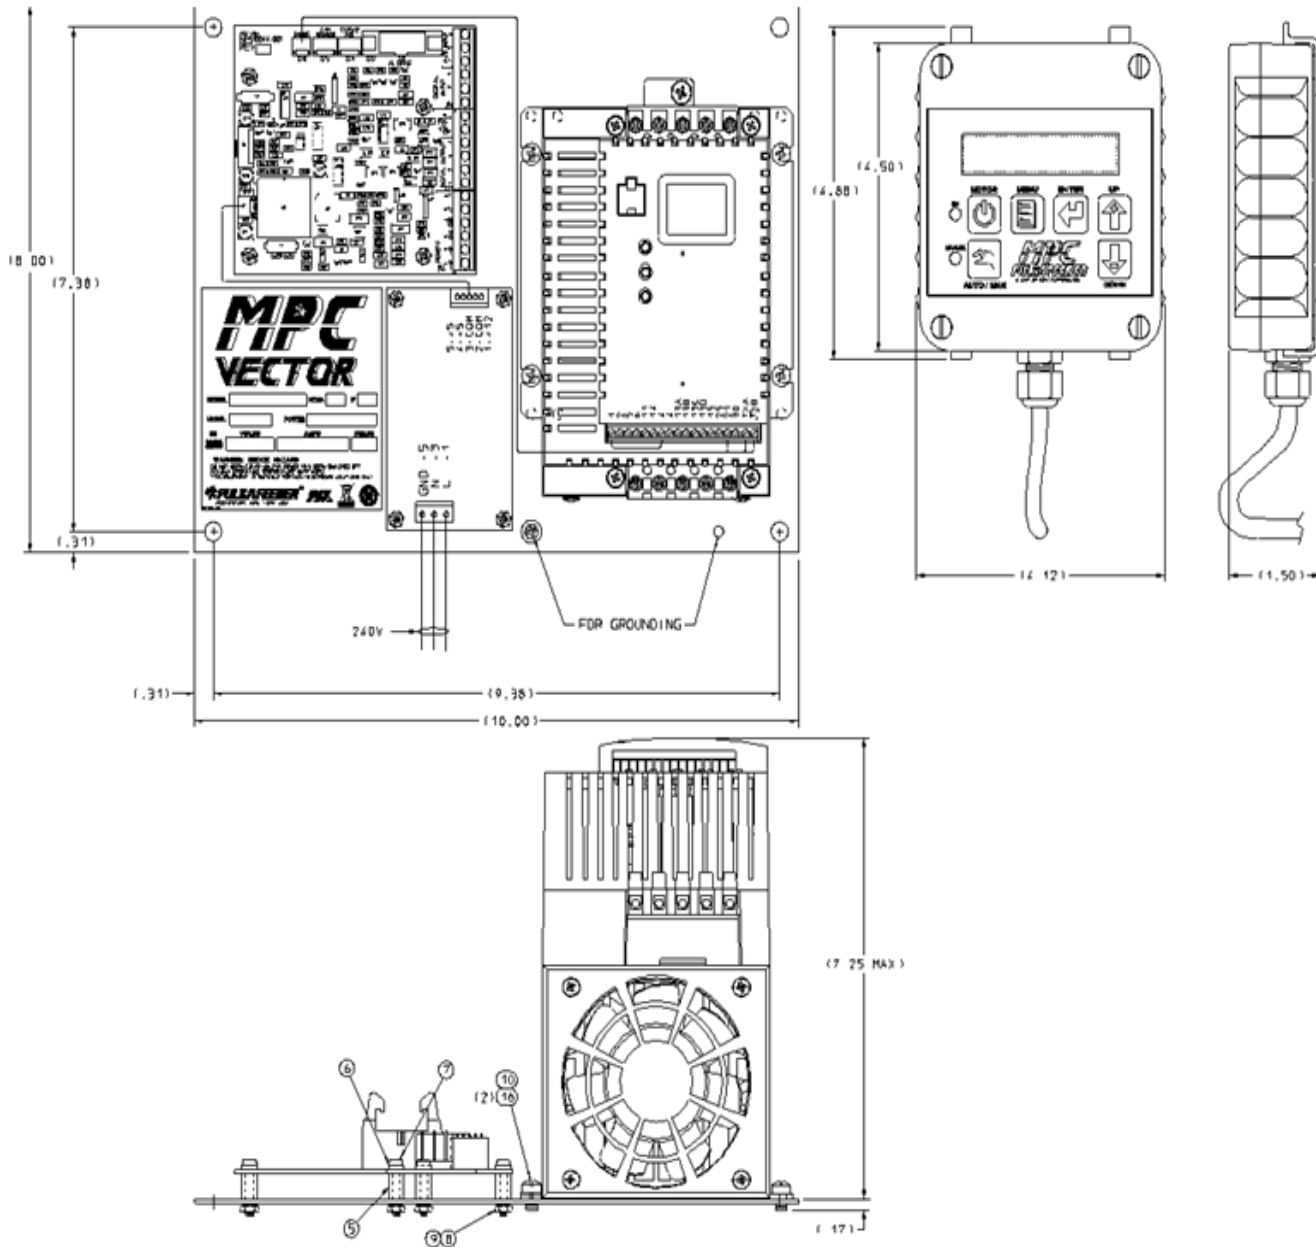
OPEN CHASSIS Panel Mount Controller Layout and Dimensions
